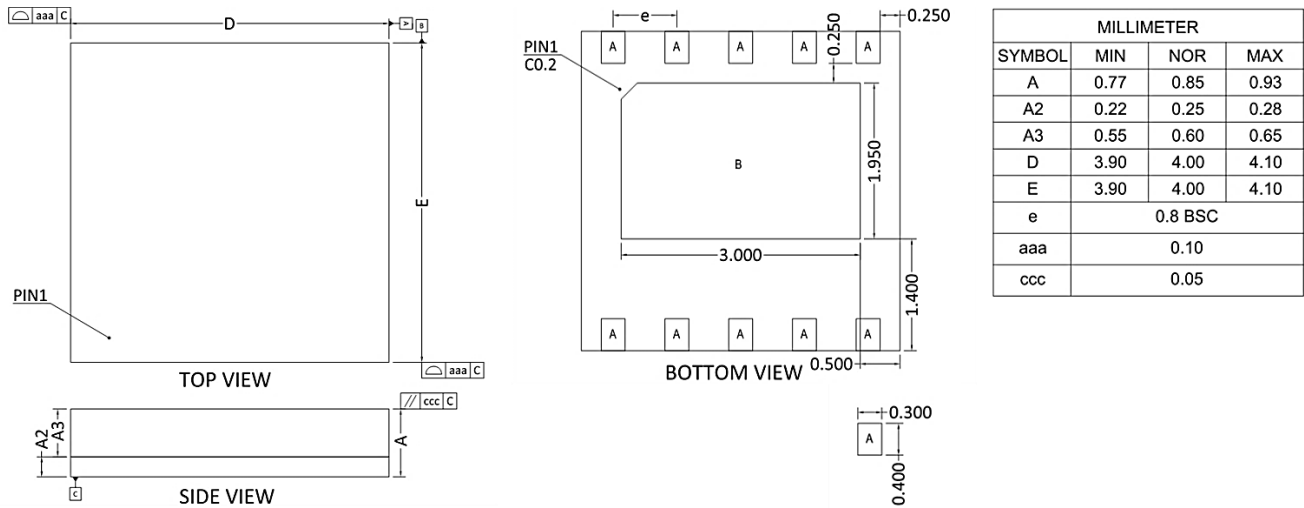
LGA10 4X4 Package Shape and Dimension
